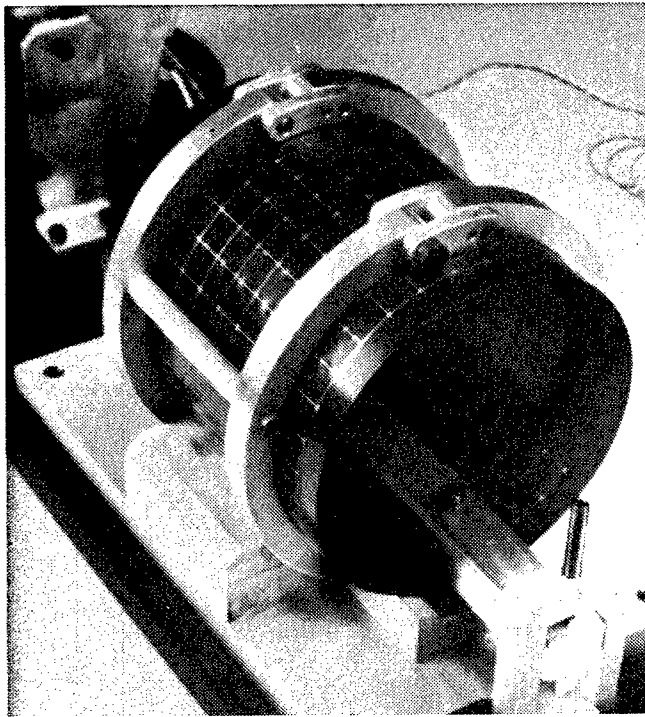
CYLINDRICAL CIRCUIT BOARD IN BONDING
